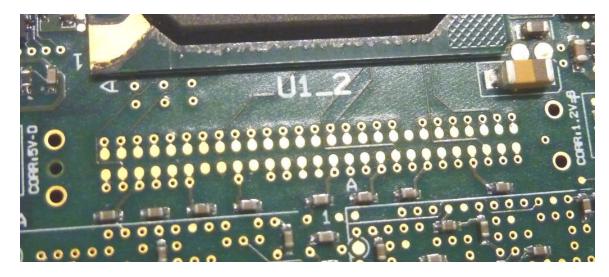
J5 header pads on the front of the Baseline Board. Pads A1-A27 run from the lower left to the lower right of the figure, and pads B1-B27 are the row above, running left to right.
